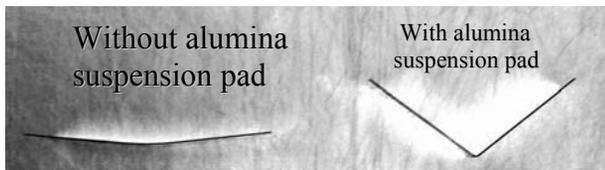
V-bending samples. The left one is a sample of partial bending without the alumina suspension pad (air bending), and the right one is with it
